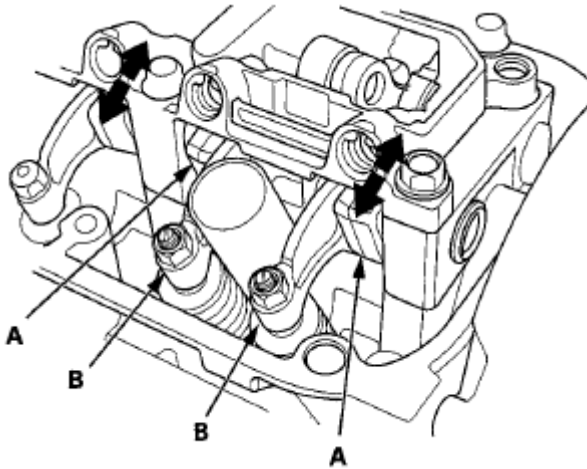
Identifying Exhaust Primary & Secondary Rocker Arm Moving Position
